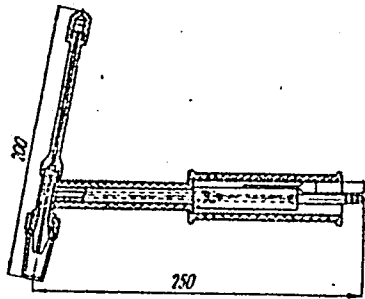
Overall view of burner for argon-arc welding (with currents of up to 200 a)
